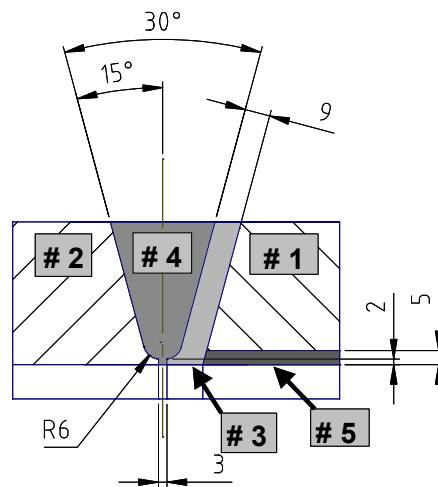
Materials used in the welds of different manufacturing techniques “A” and “B” (Eriksen et al. 2004).
